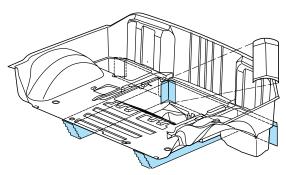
Cut and Remove Left and Right Corners (Right Corner Shown)
